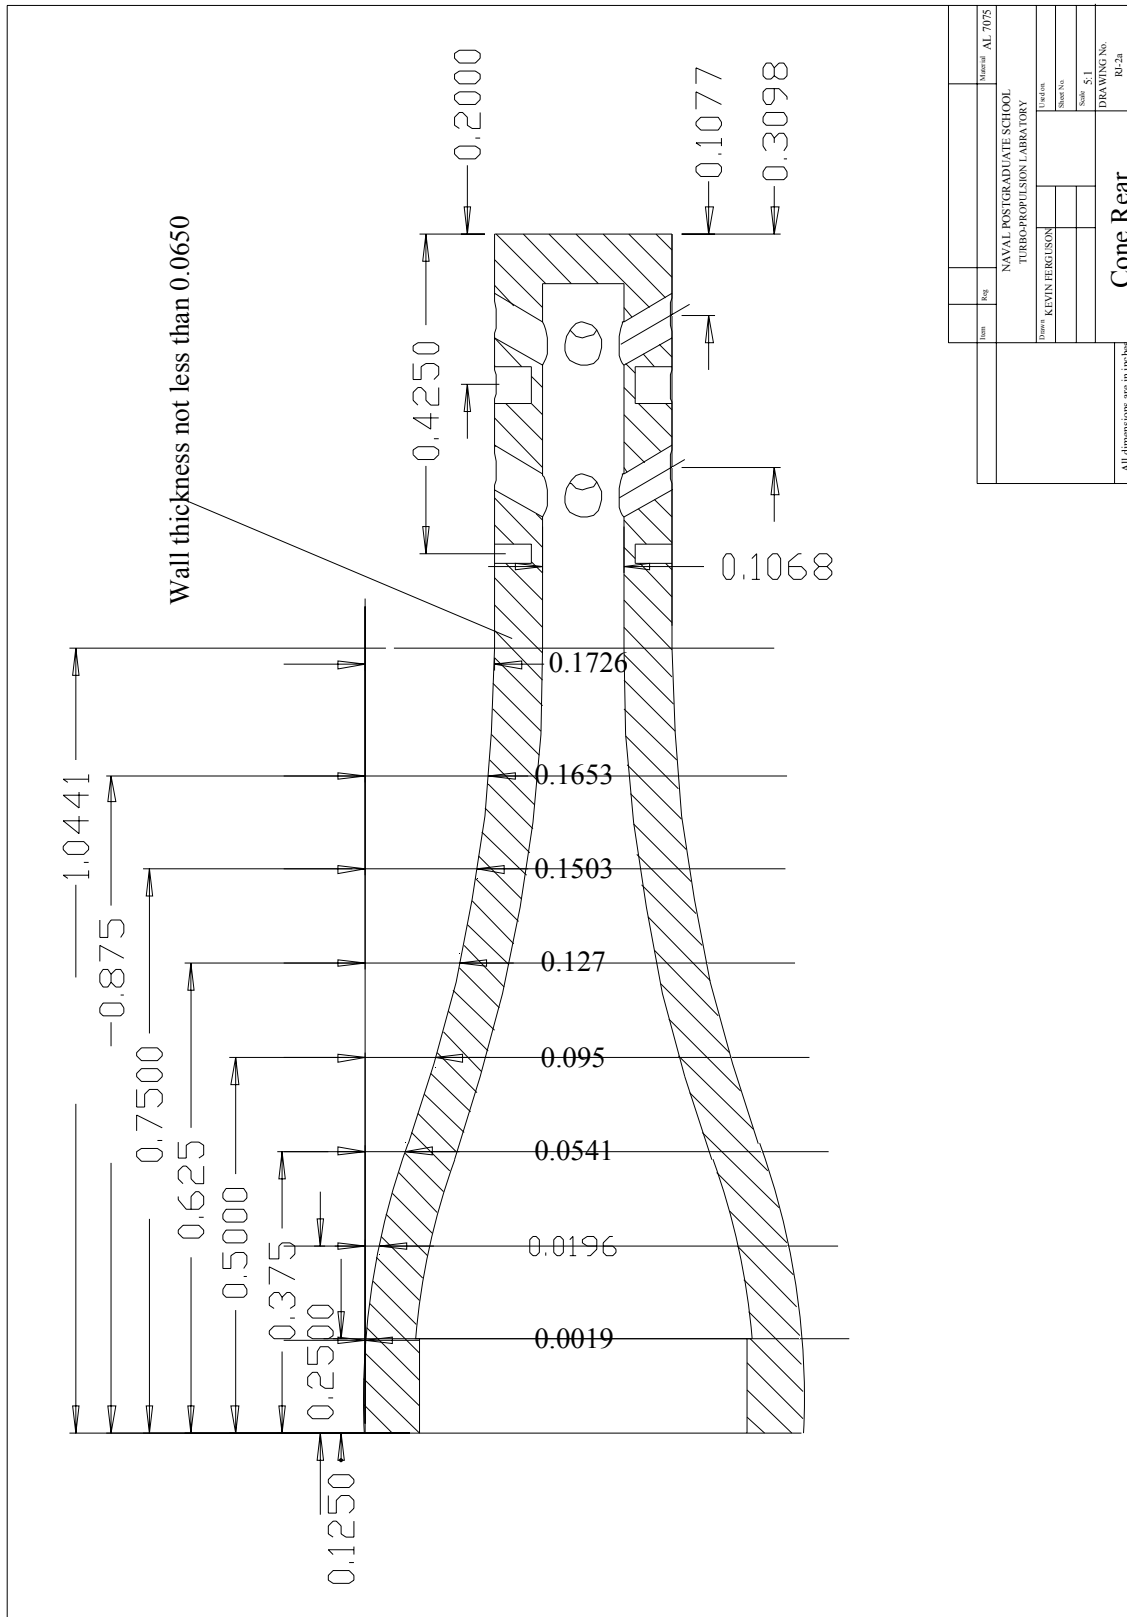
Part drawing: Contour of rear of inlet nose cone (RJ-2a)
